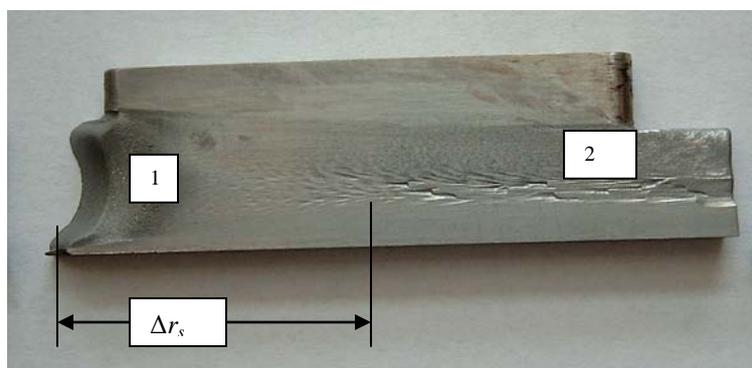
The view of a rotor mill blade: 1 – impact erosion zone, 2 – friction erosion zone
